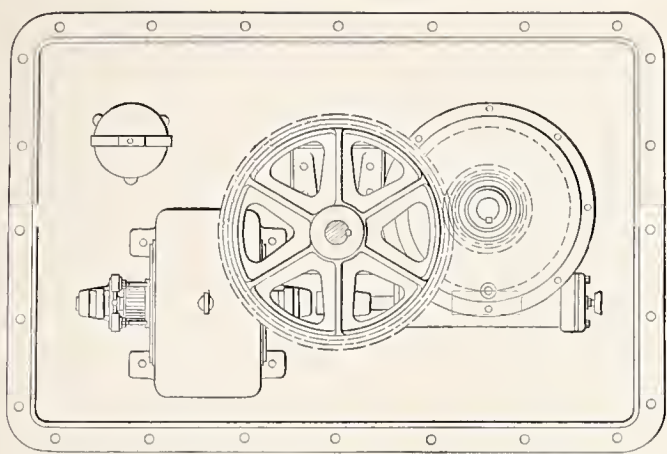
PLAN AND SECTIONAL ELEVATION OF THE CAPSTAN
